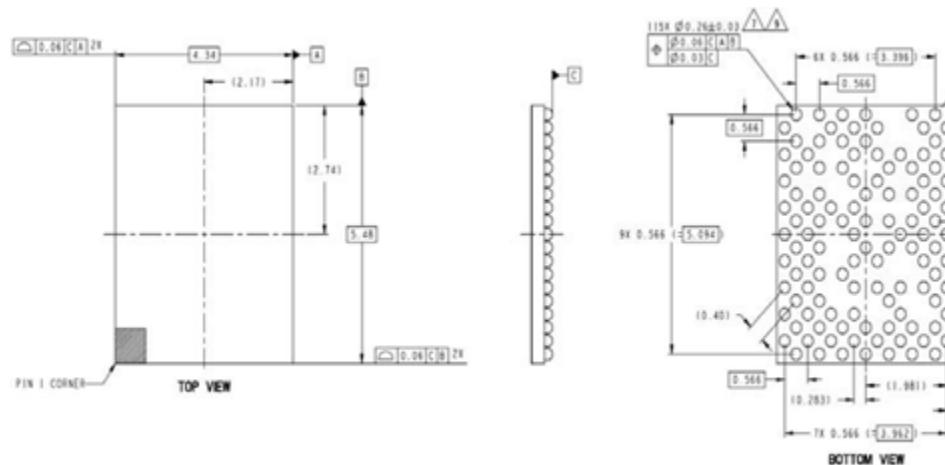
QCA9377 mechanical dimensions, top and bottom views
